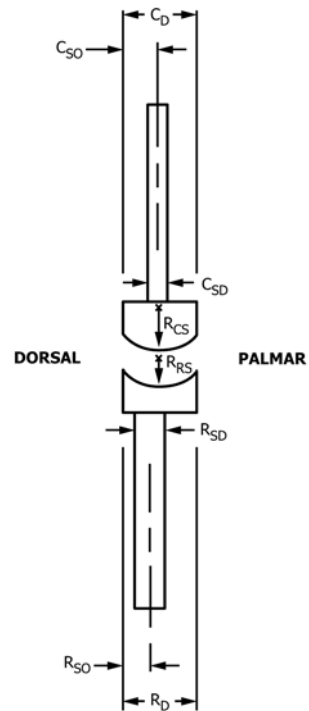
Dimensions of Wrist Joint Replacements (Sagittal Plane)
